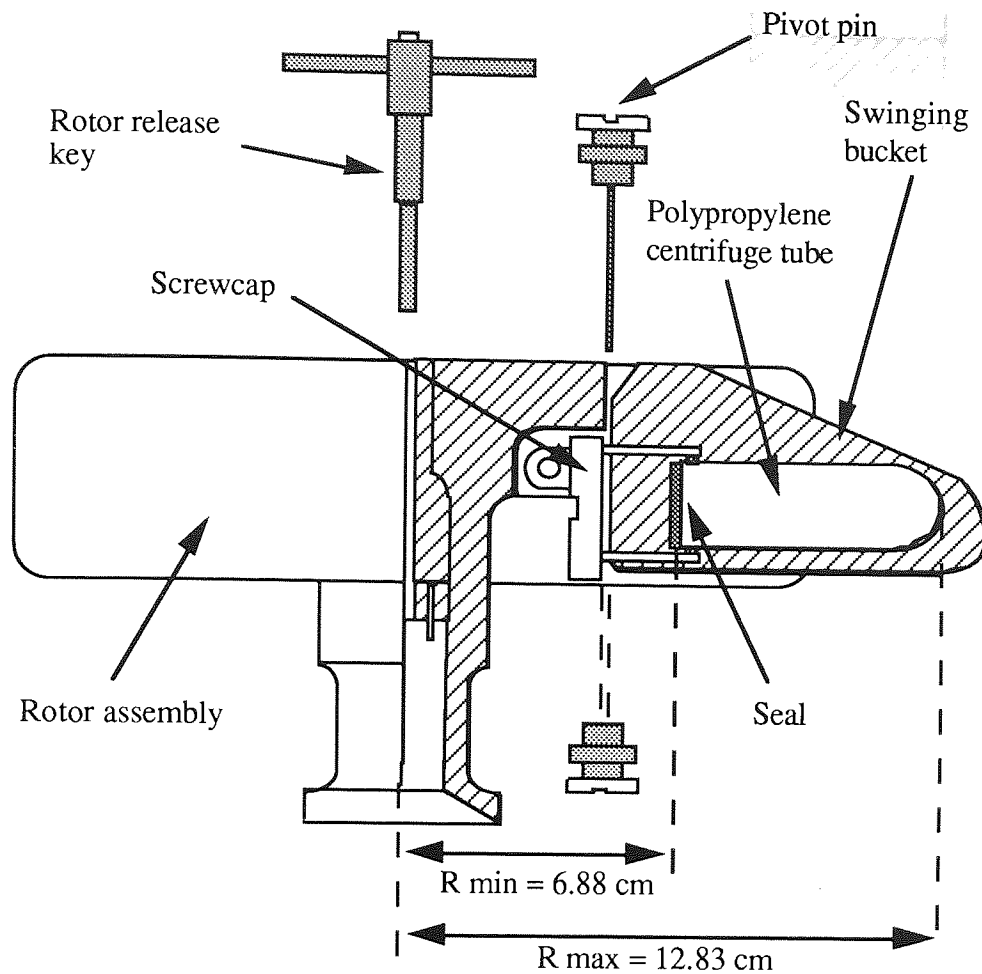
The MSE 3 x 20 cm³ Swinging Bucket Rotor Assembly
